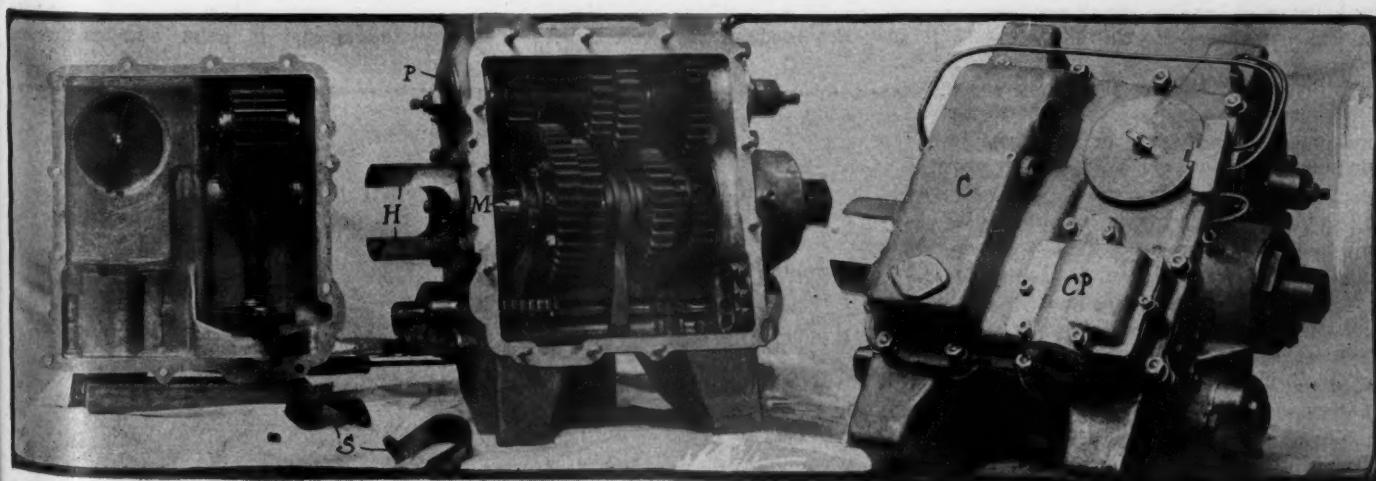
THE 1910 PEERLESS GEARBOX ENTIRELY ENCLOSES THE SHIFTER PARTS
